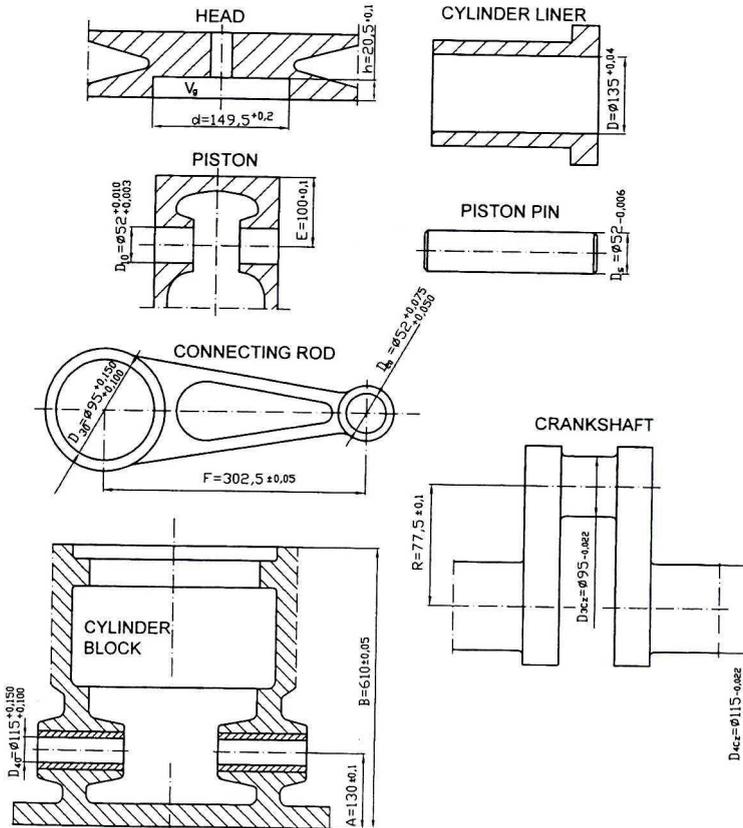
Sketches of engine component parts with associated toleranced dimensions [2]
